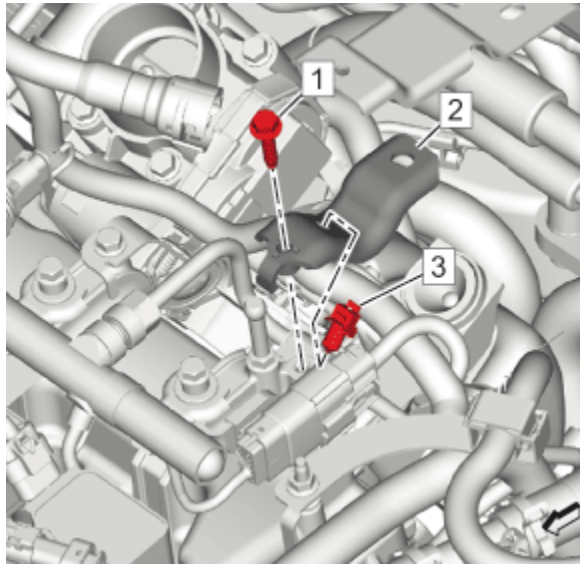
Air Cleaner Resonator Bracket, Bolt And Wiring Harness Clip
